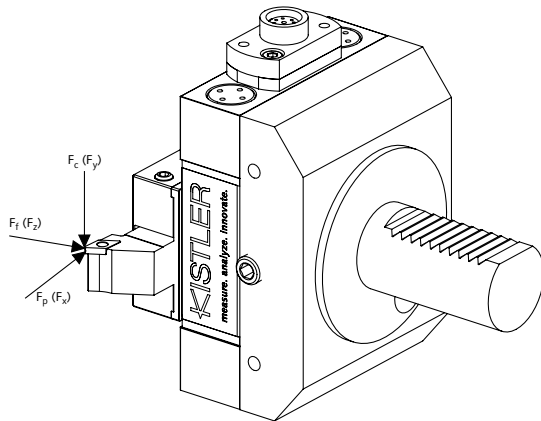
Dynamometer Type 9119AA2 with tool holder Type 9119AE16 and VDI tool holding fixture Type 9119AB30S
